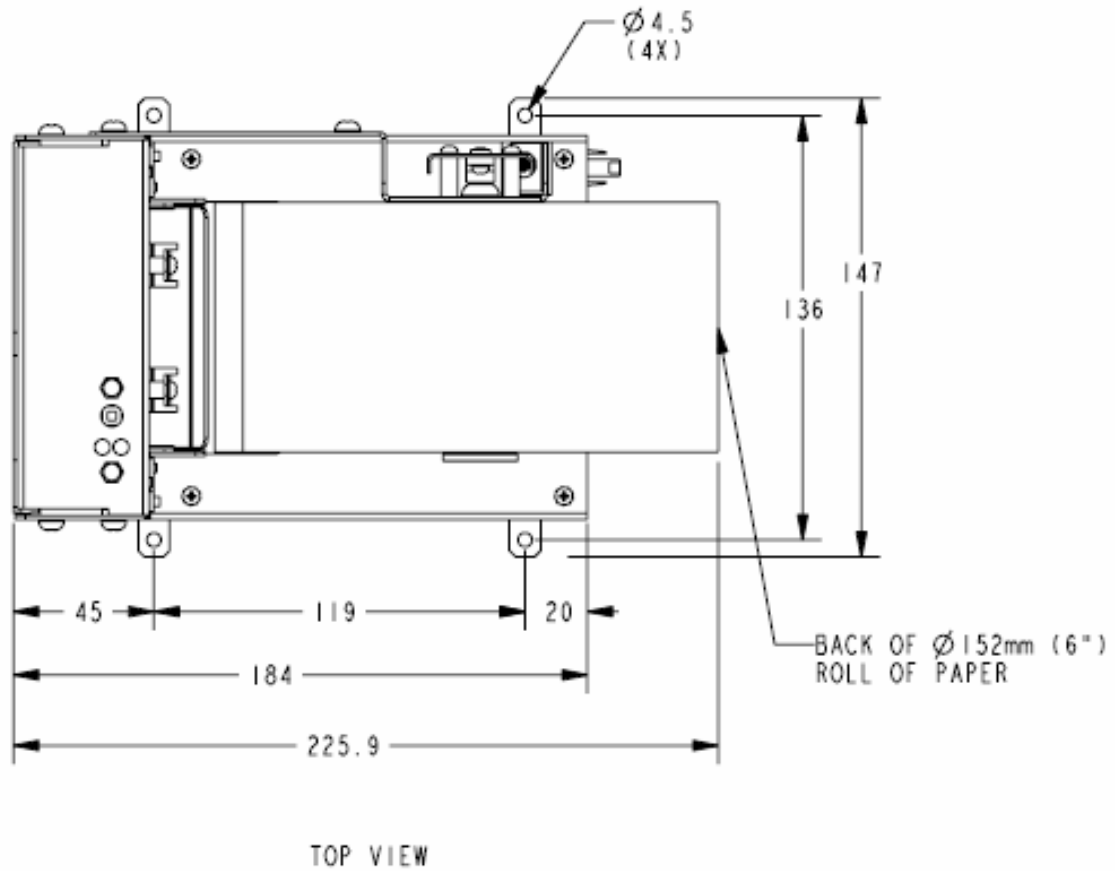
Mechanical Dimensions - High Speed Kiosk Compact Top View
